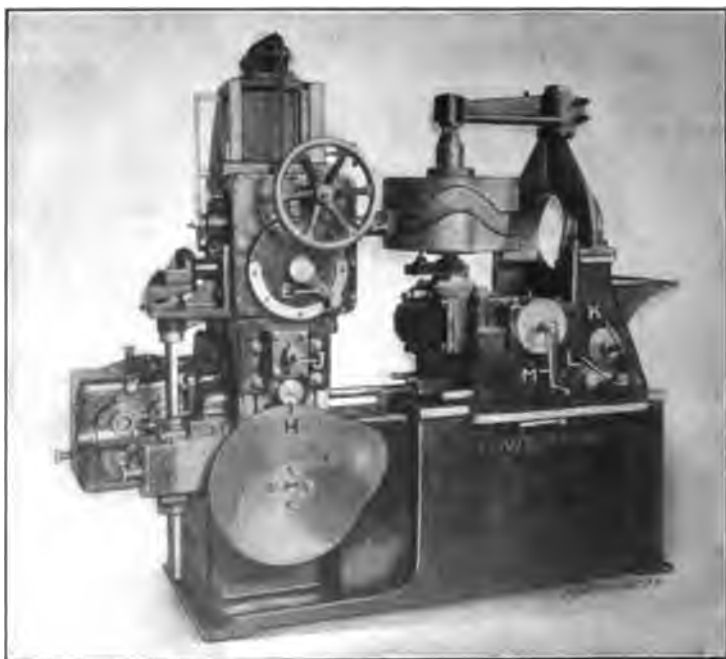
Rowbottom Cam Milling Machine arranged for Milling a Face Cam adjustable screw *I*. This screw is turned by placing a crank on squared shaft *J* when it is desired to move the cutter slide on the column for varying the distance between the cutter and the center of the work spindle. A scale on the column shows the distance that the cutter has been set off center.
